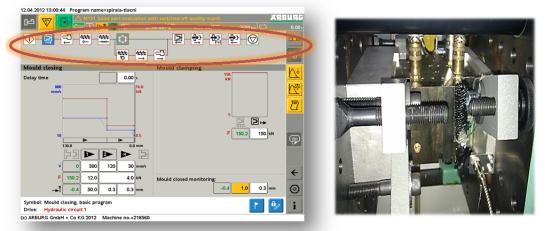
Mold closing, mold clamping screenshot and closed mold picture
